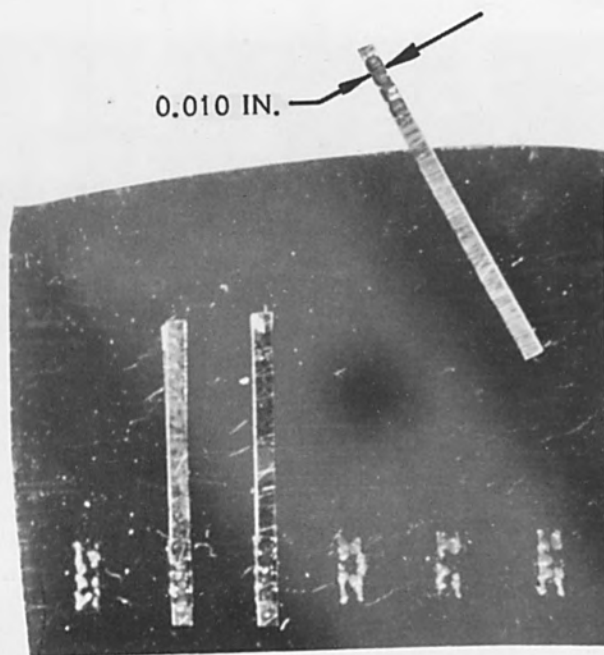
Gold Tabs Welded to Gold Deposition
